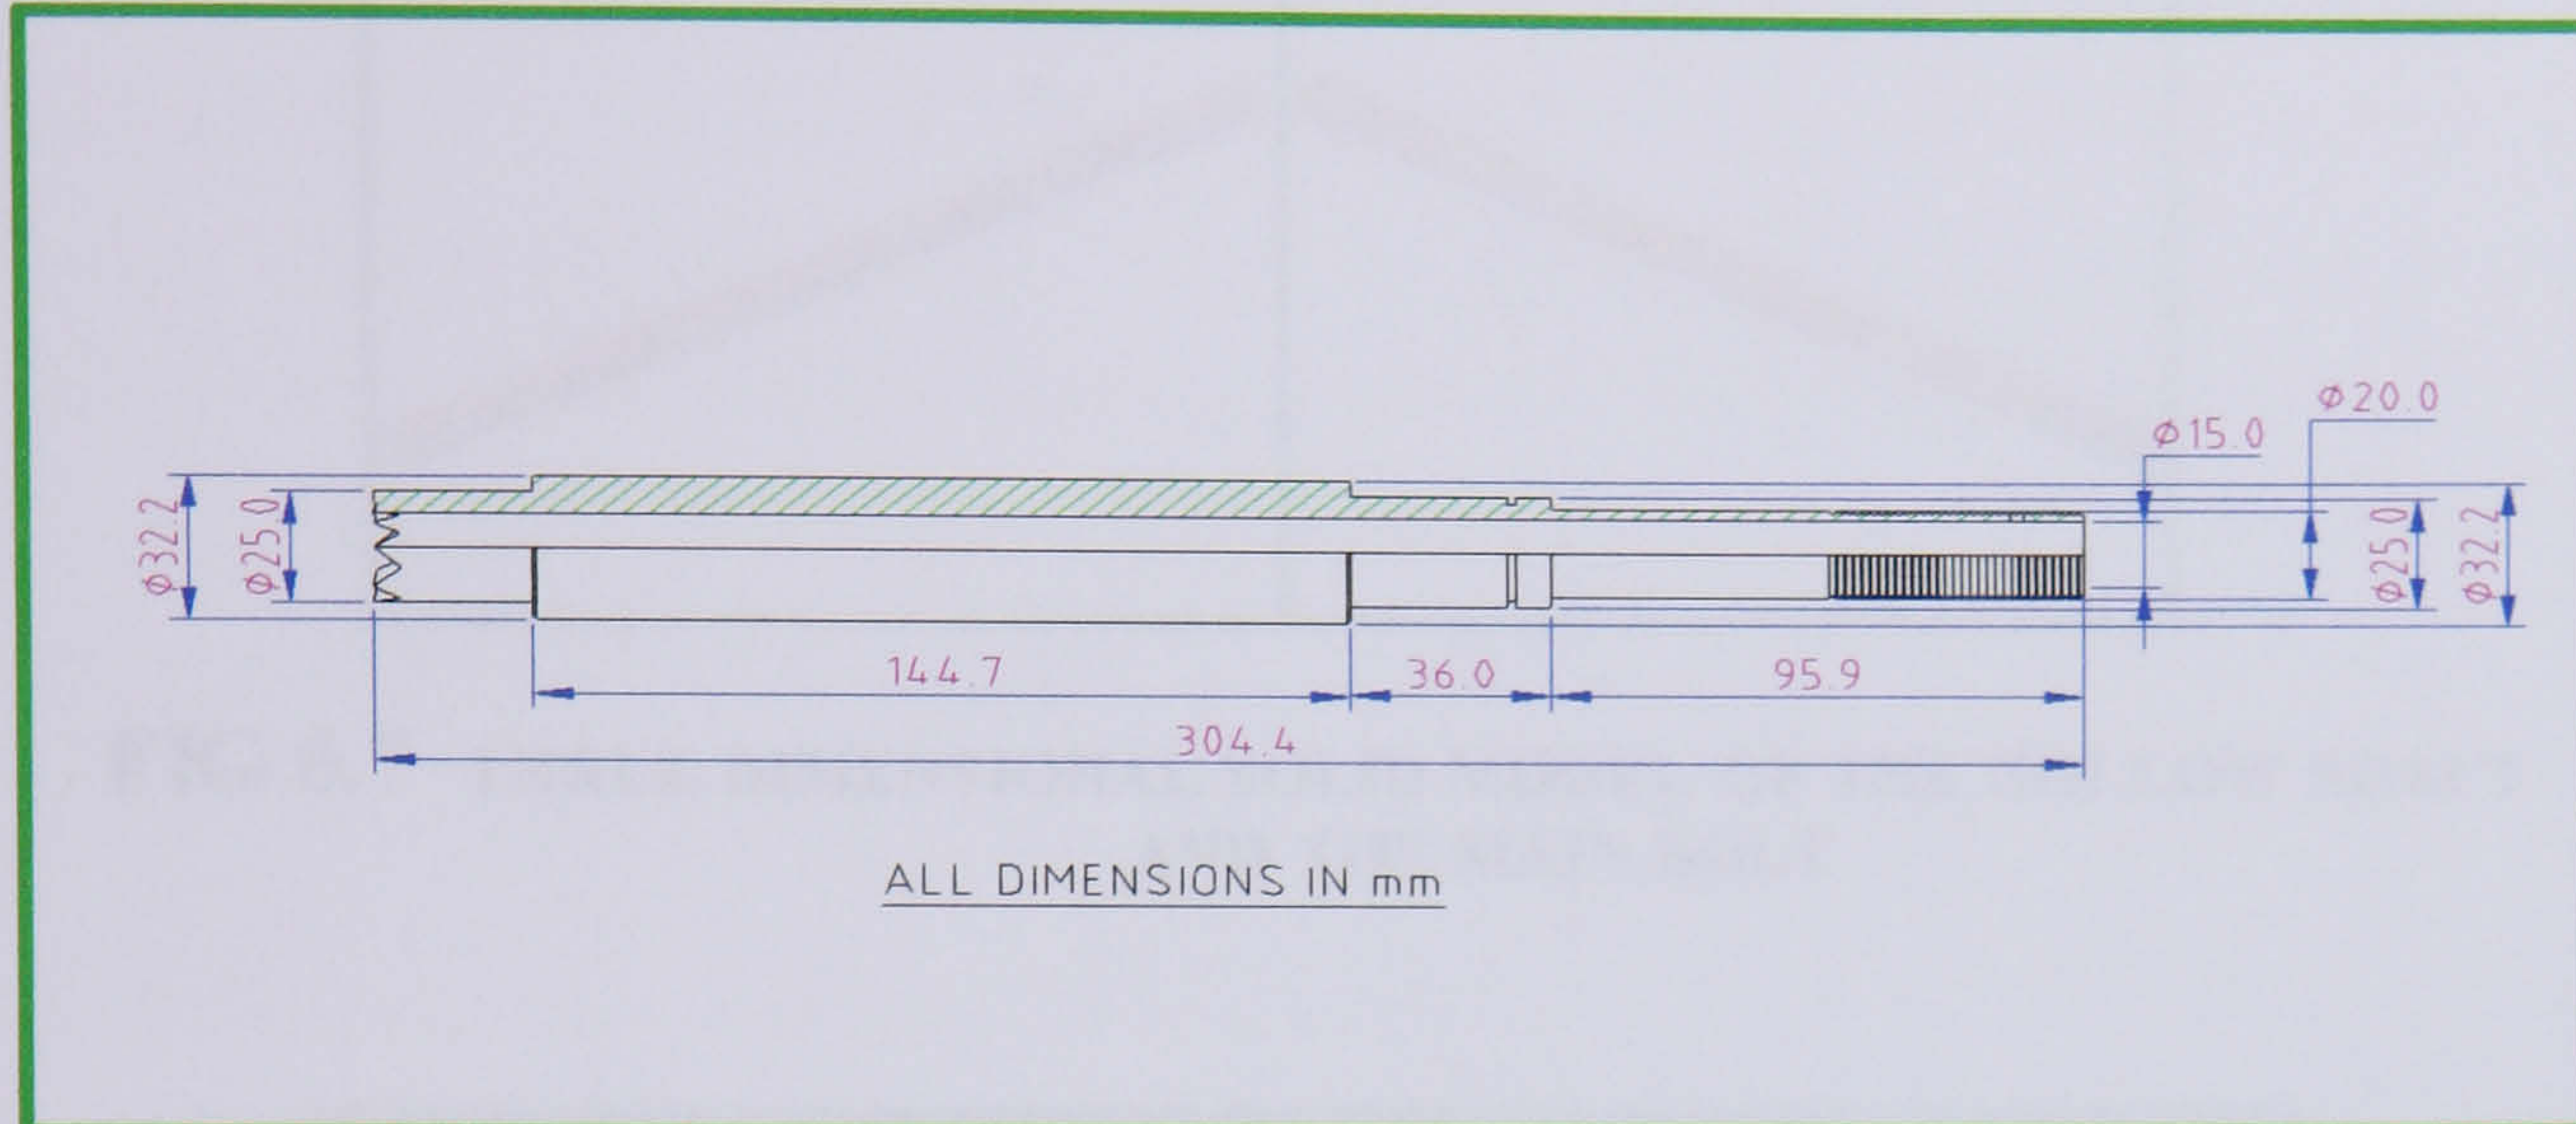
DETAIL DIMENSIONS OF THE HOLLOW SHAFT
